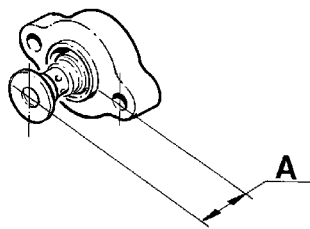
D12C, oil cooler thermostatic valve (discontinued)
